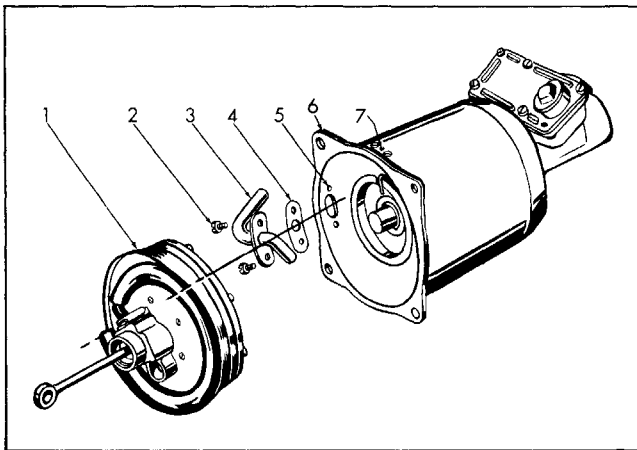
Removal of Vacuum Tube and Piston Assembly
